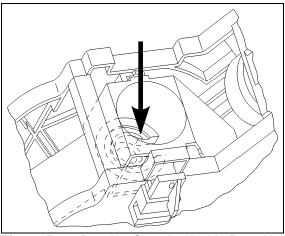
Brewing Chamber inside Brew Unit Assembly
